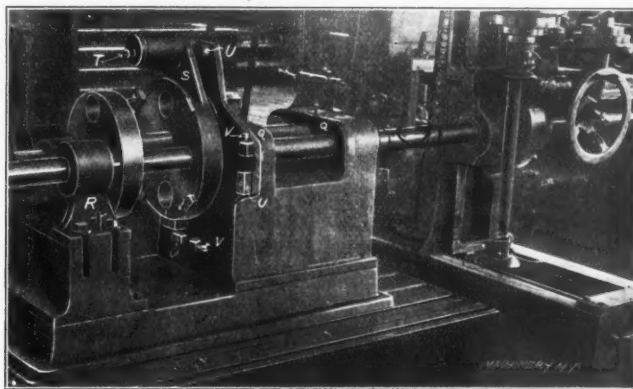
Finish Boring the Spindle Holes in an Accurate Indexing Jig.
